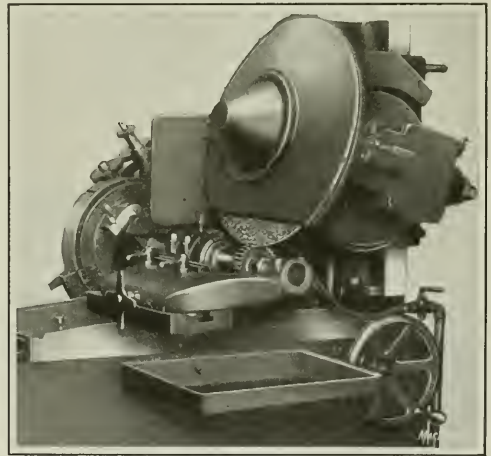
Gear-tooth Grinding Machine of the Generating Type
